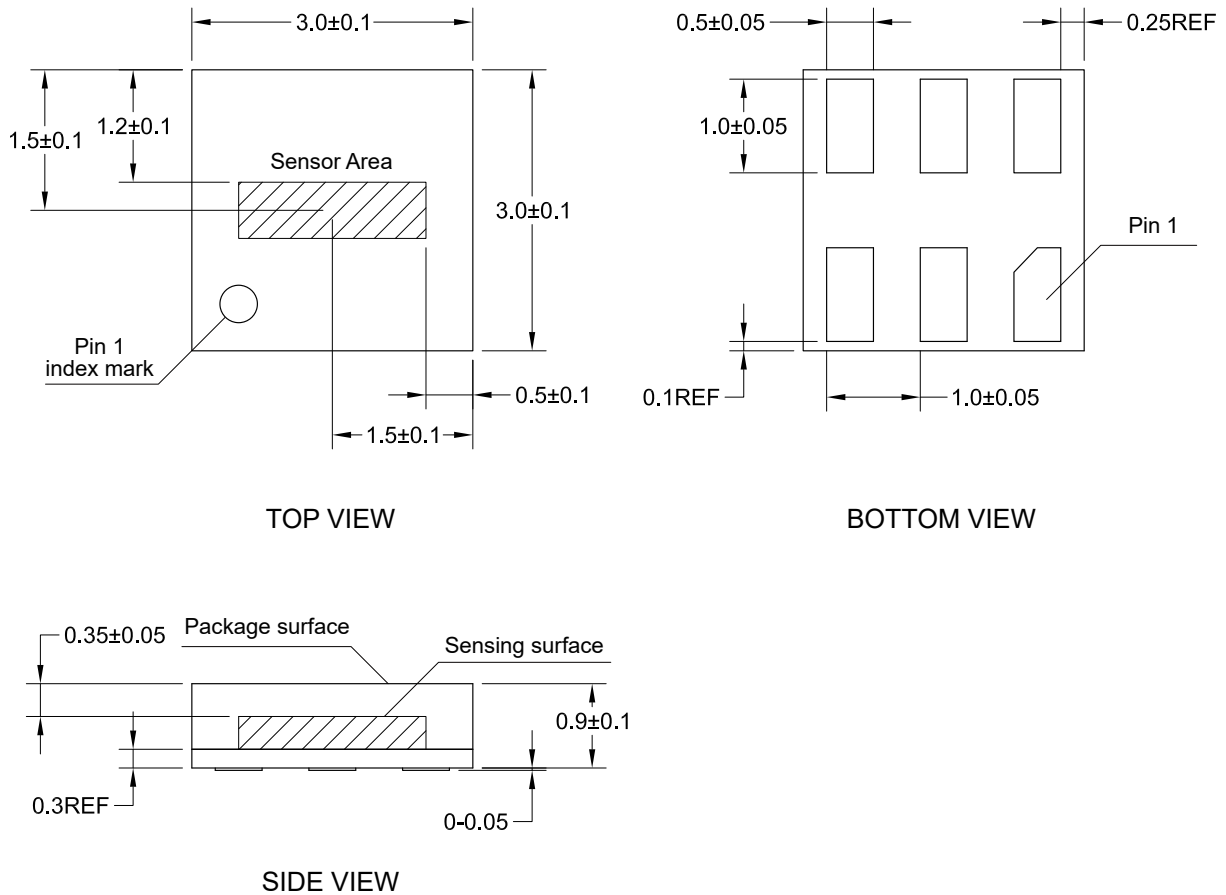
LGA6L (3×3×0.9) Package Drawing (unit: mm)
